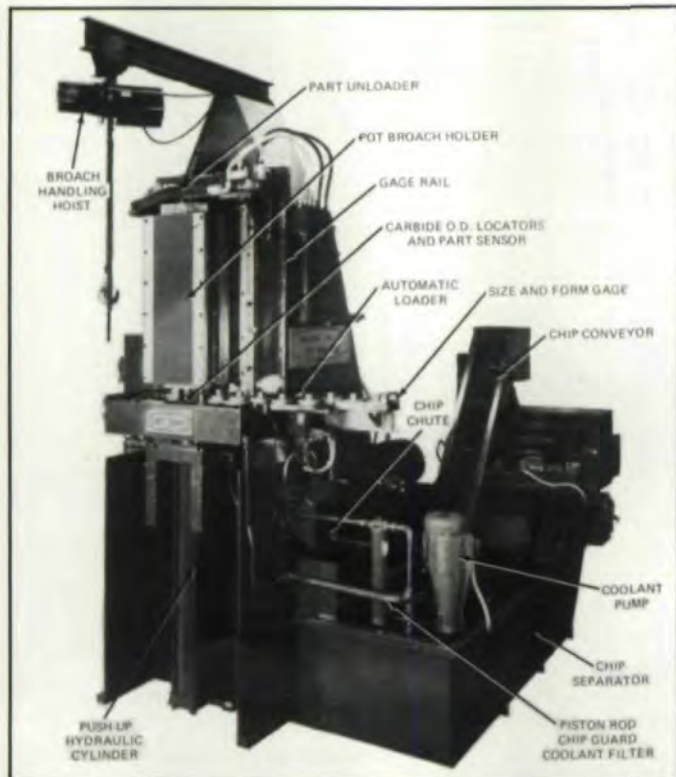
A 25-ton automated push-up pot broaching machine that can produce external gears, splines and tooth forms at rates up to 450 pieces per hour.
